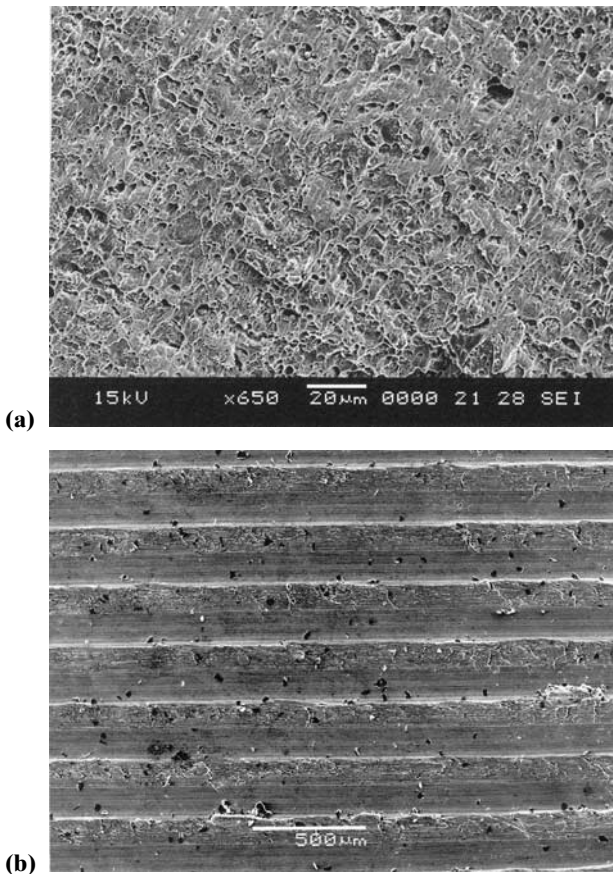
Images from a scanning electron microscope (SEM) for optical assessment of fracture and machined surfaces. (Courtesy of Jeol UK Ltd.)
